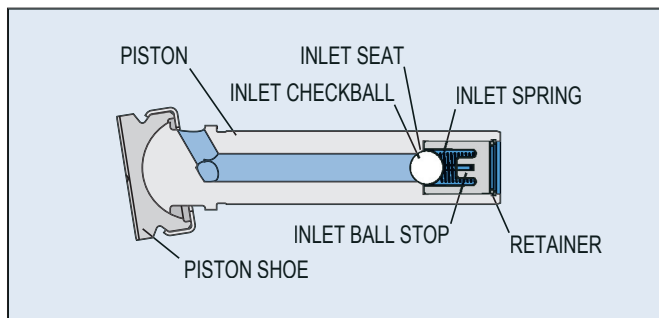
Typical piston assembly showing piston shoe and inlet checkball components inside piston.
